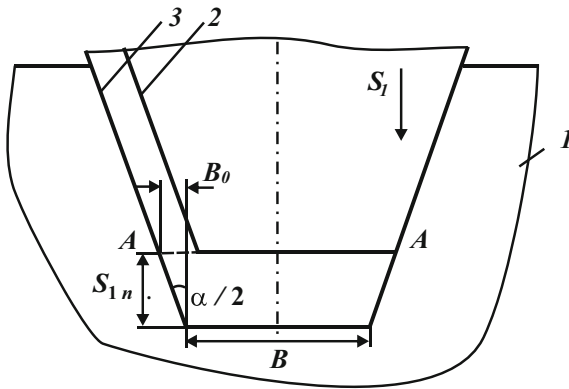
The calculation scheme of gear grinding parameters using the profile copy method: 1 – gear; 2, 3 – grinding wheel positions at $(n - 1)$ and n passes.
